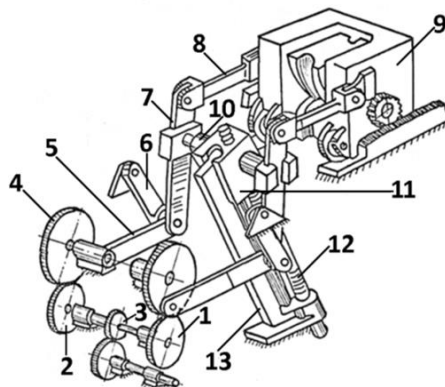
Scheme of the lever drive mechanism of the KhPTK mill [3]
